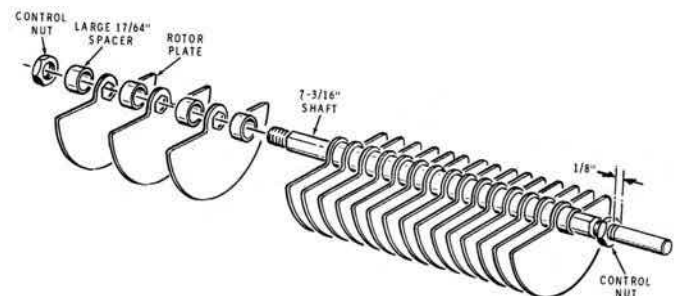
C2 Rotor Assembly; from Heathkit Manual.
